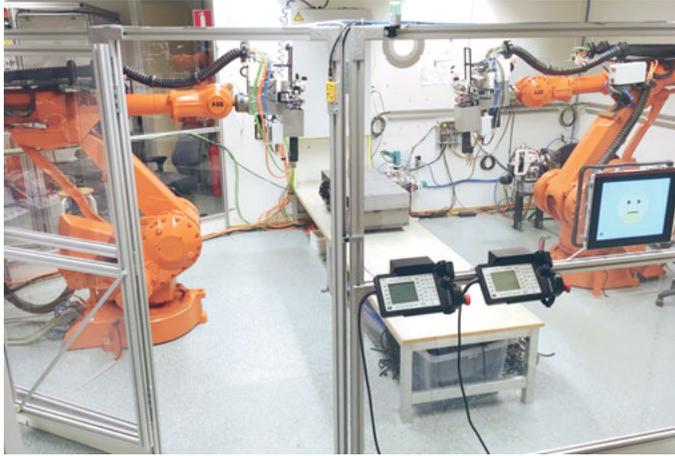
The second constructed prototype version of the stator cable winding robot cell.
